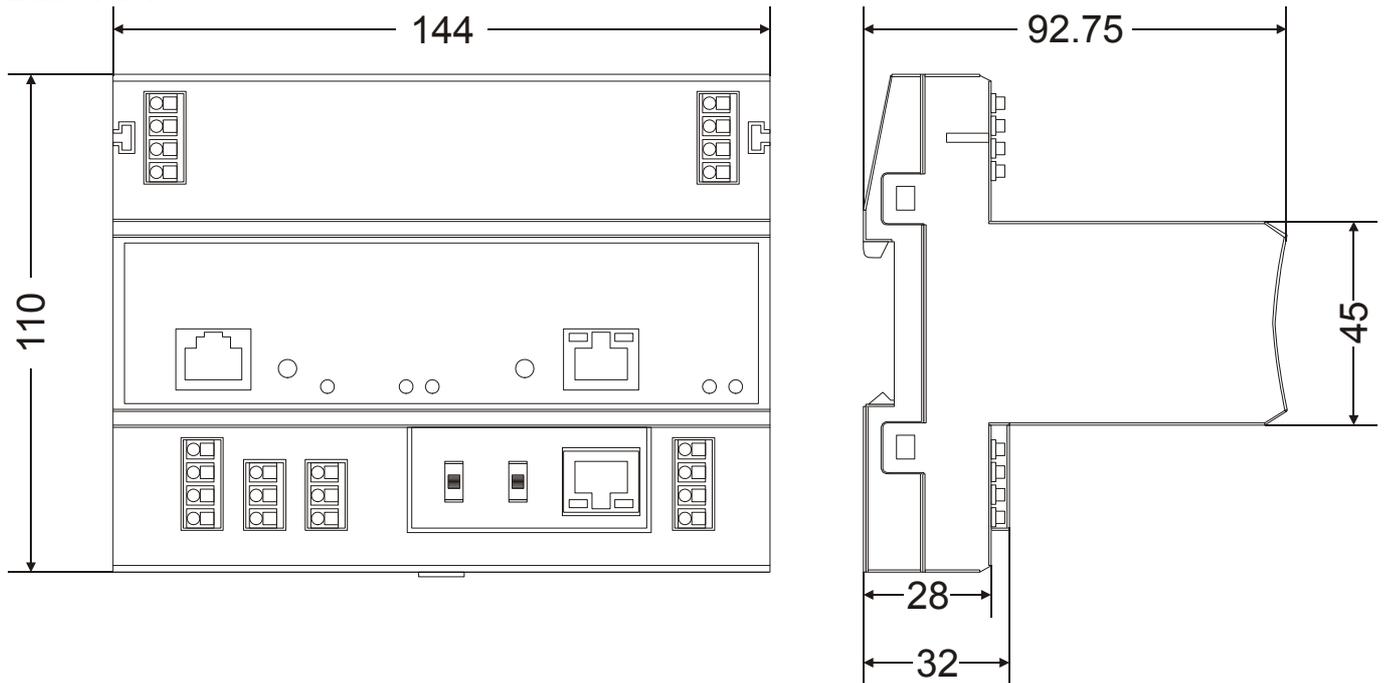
CLLIONLC01 Controller Module, outside dimensions (in mm)
